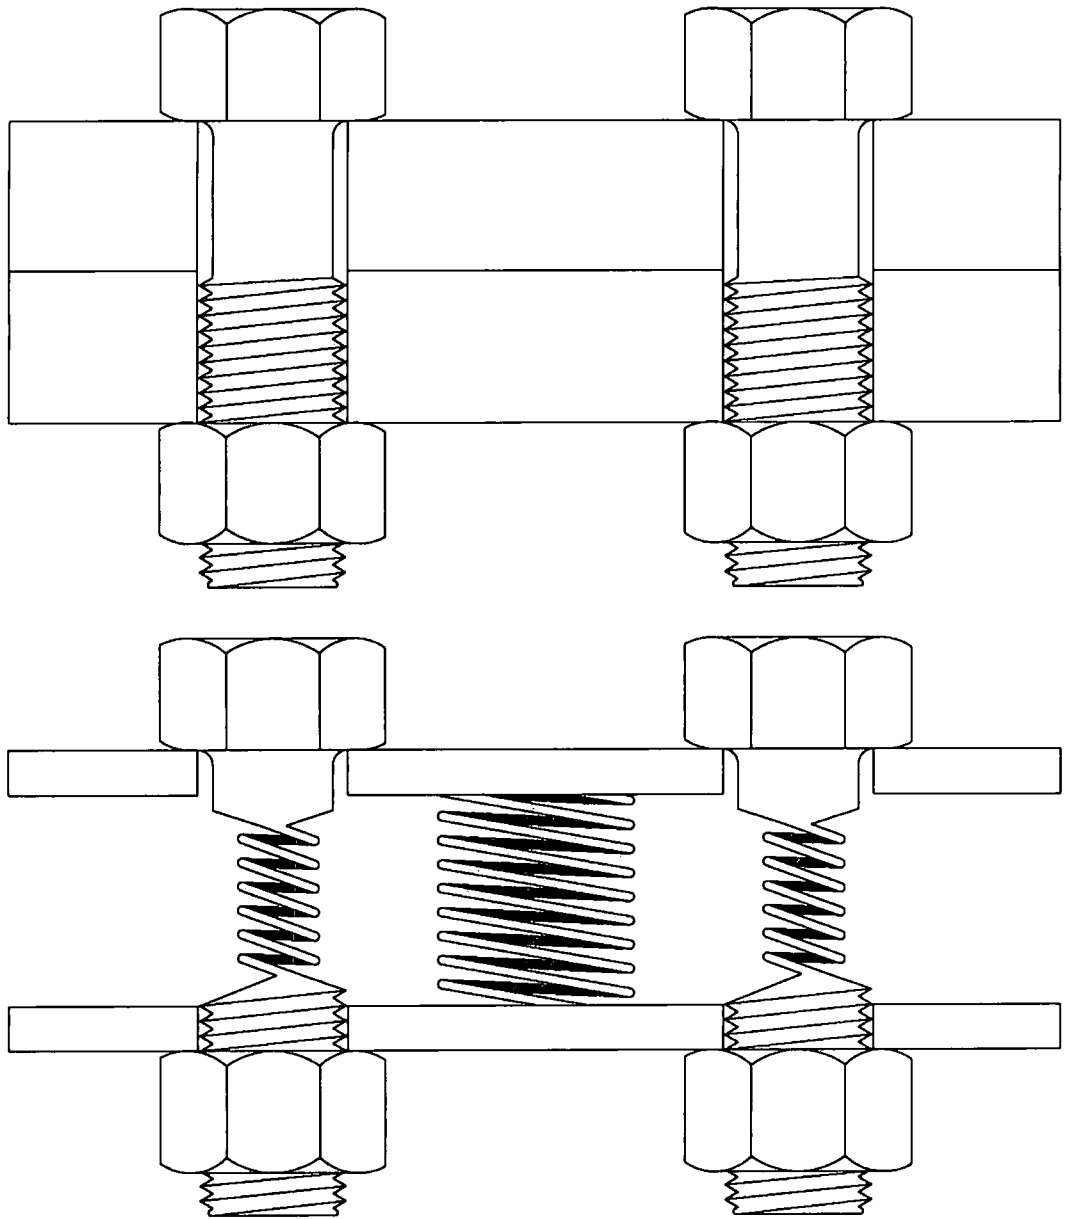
Drawing simulating a bolted joint to a series of springs.
